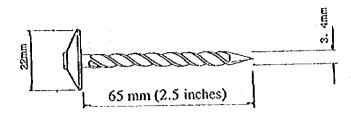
Dimension Drawing of Umbrella Head Nail
